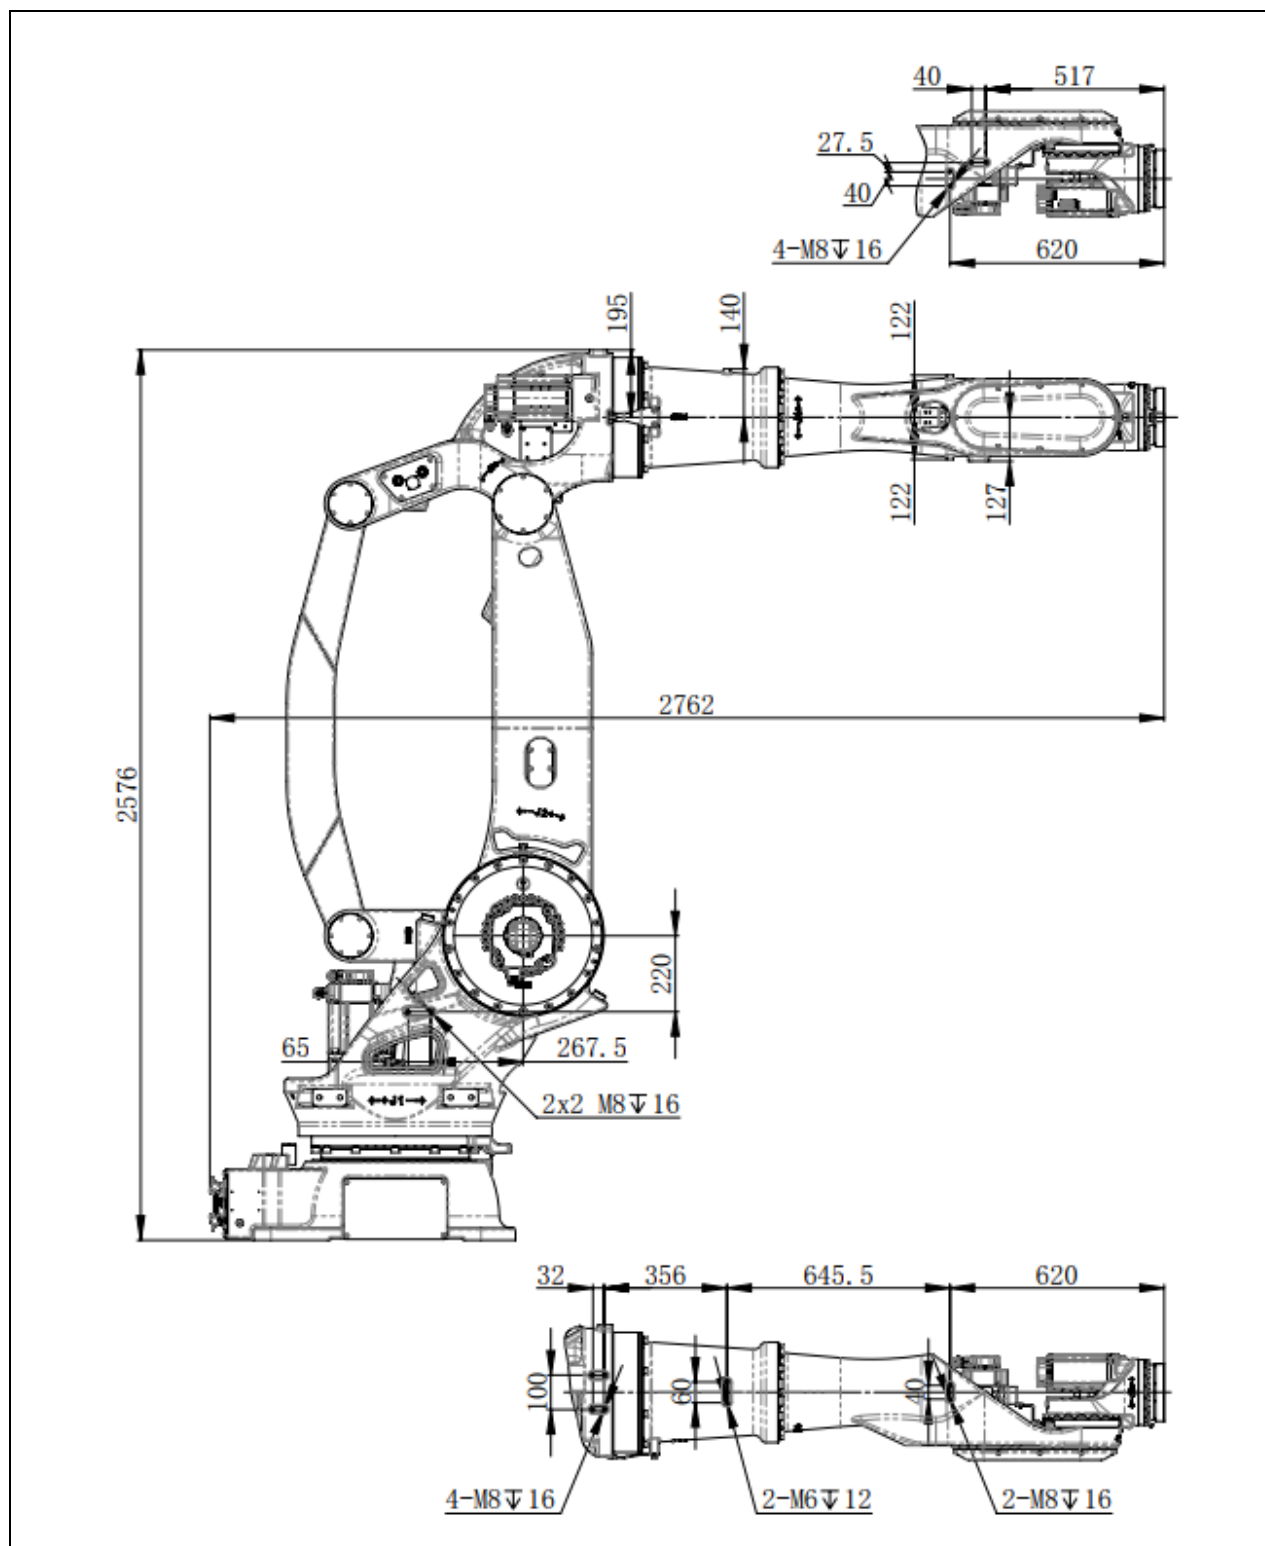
Equipment mounting face (ER280-3200-LI)
